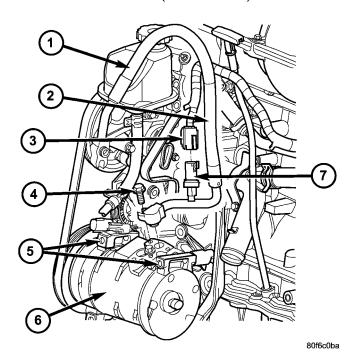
A/C COMPRESSOR REMOVAL/ INSTALLATION- 2.4L TURBO
